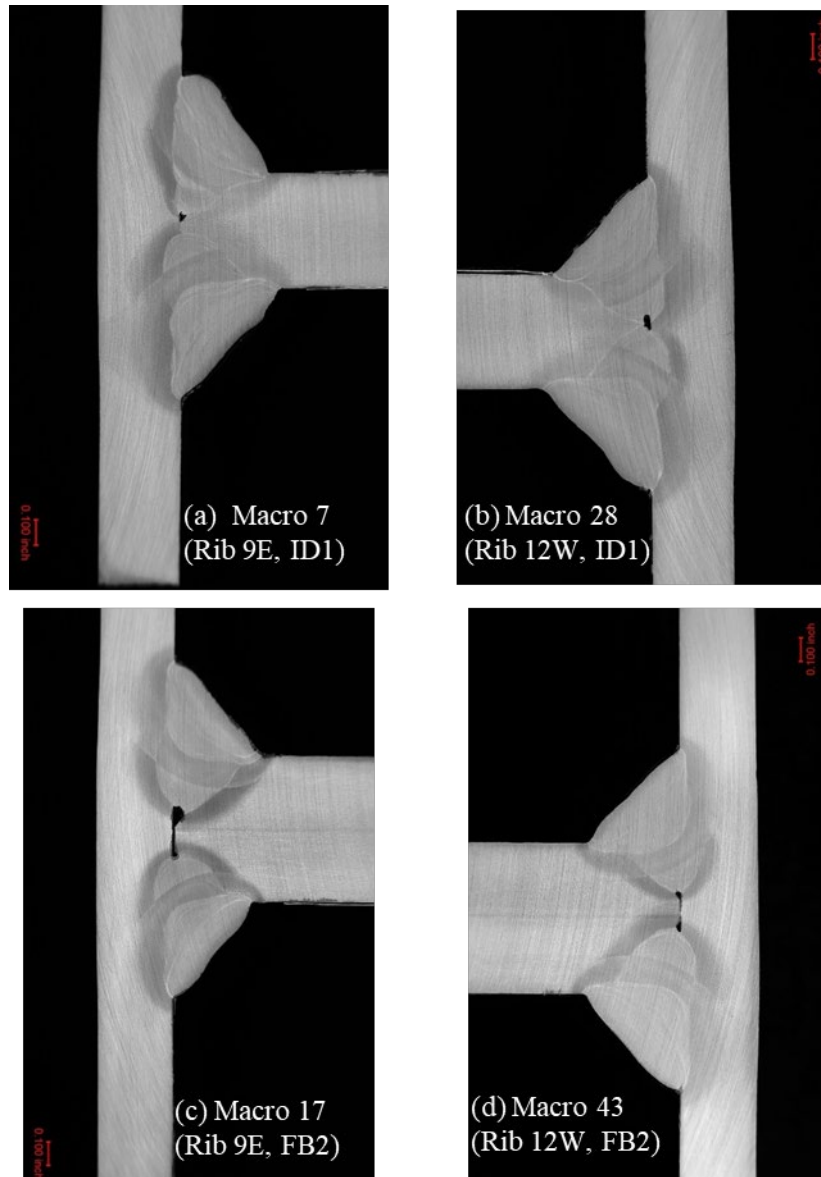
shows the Type 2 macro-etch specimens through the PJP weld at the RFB connection at Rib 9E and 12W. The welds were found to be of high quality, and without any indication of weld toe or throat fatigue cracking.
